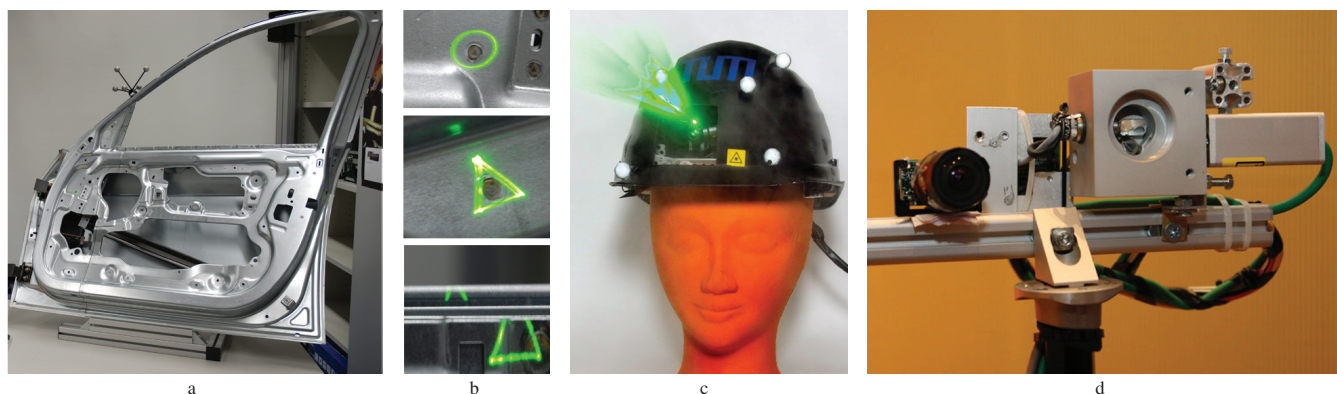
a) A white body (here a car door), with about 50 welding points b) Projected images onto the white body. c) First prototype of a laser projector for Augmented Reality: head-mounted, integrated into a helmet. d) Second prototype: tripod-mounted, consisting of a wide angle camera for optical tracking, a galvanometer scanner and a 1 mW laser (from left to right).
